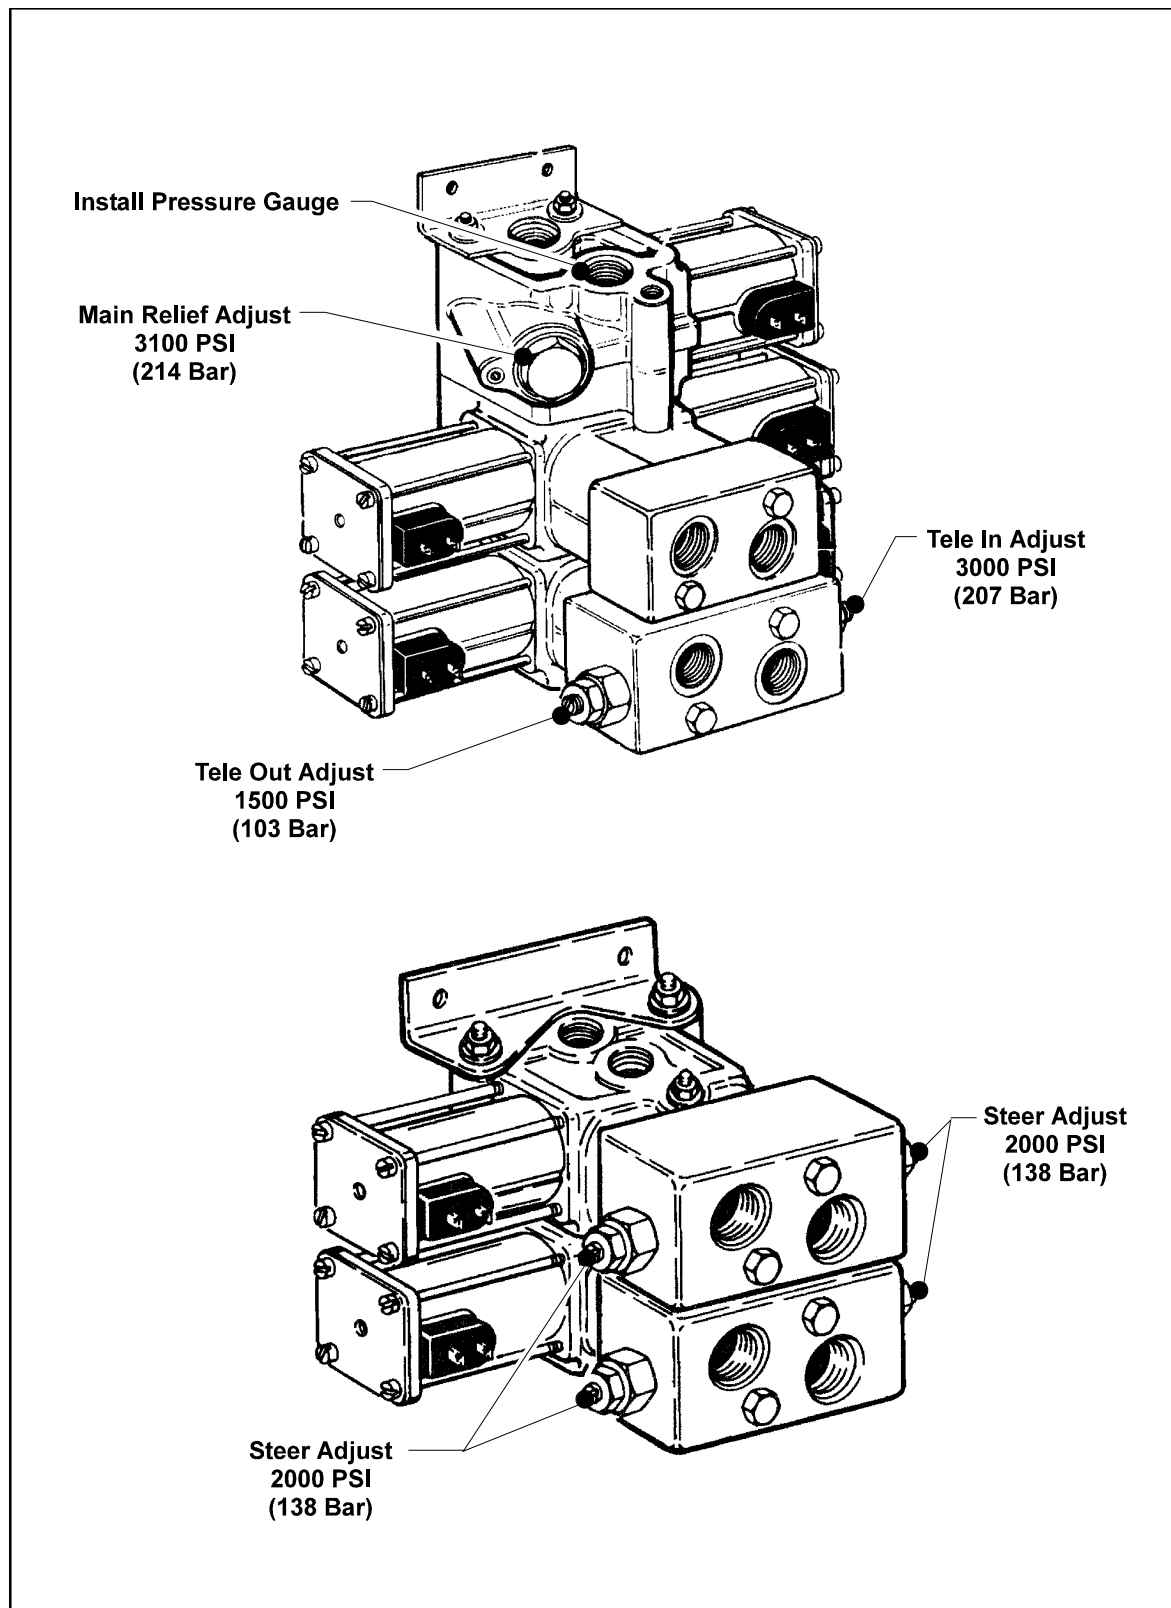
Solenoid Valve Pressure Settings - 4 Wheel Steer
